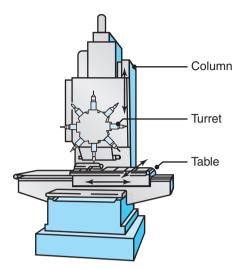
A three-axis computer-numerical-control drilling machine. The turret holds as many as eight different tools, such as drills, taps, and reamers.
